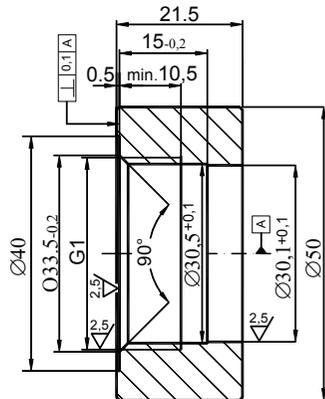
Weldable fitting ring for use with transmitters with CG1 - type connector
